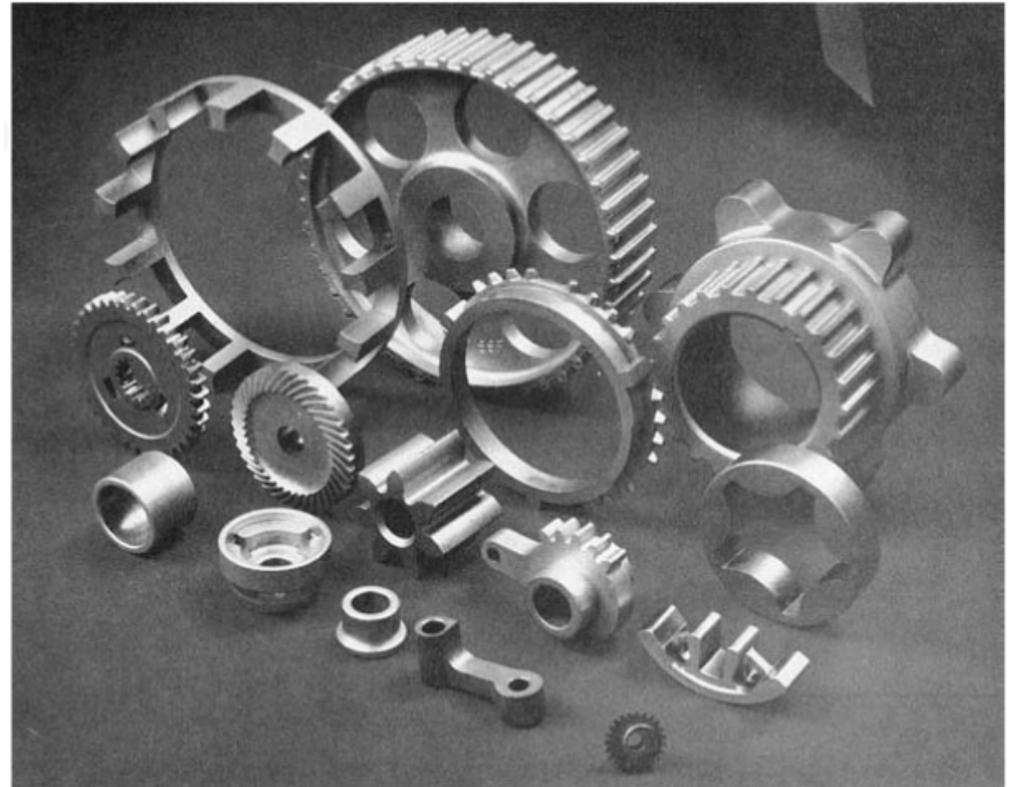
A collection of powder metallurgy parts. (Courtesy of Dorst America, Inc.).
